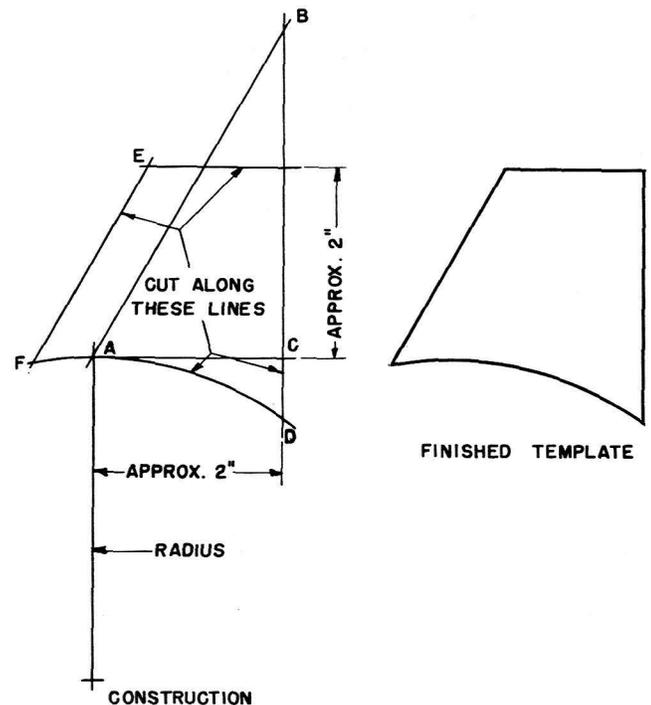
Template for Setting Baylis-Type Brush Holder
